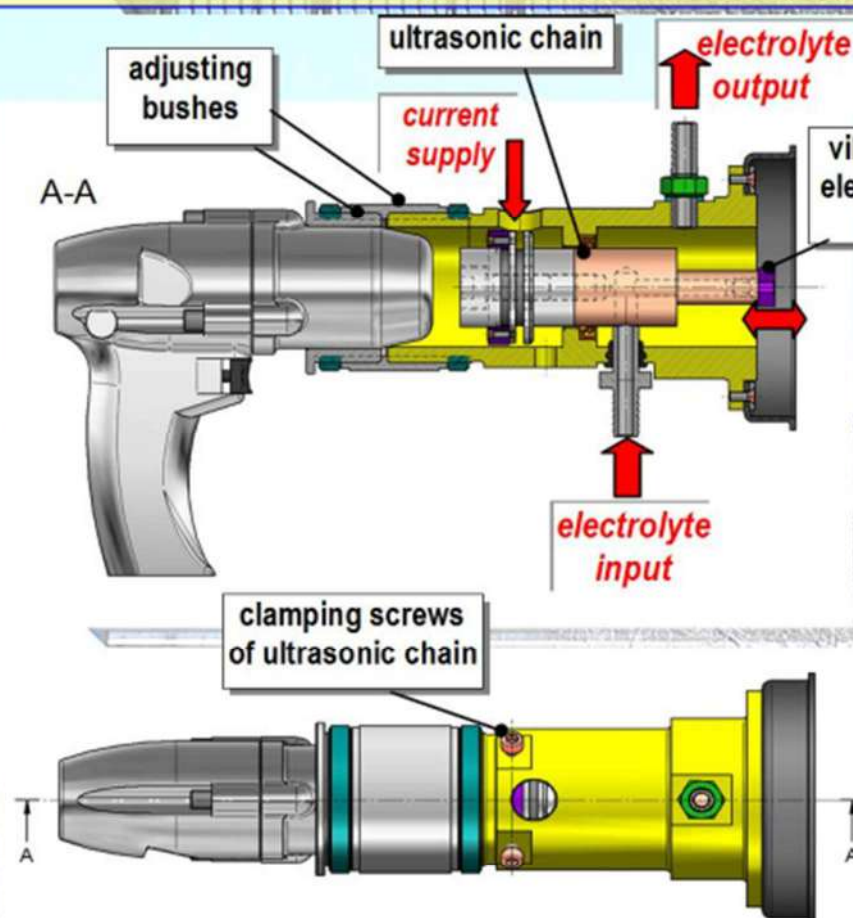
Mobile equipment for ECM aided by ultrasonics
